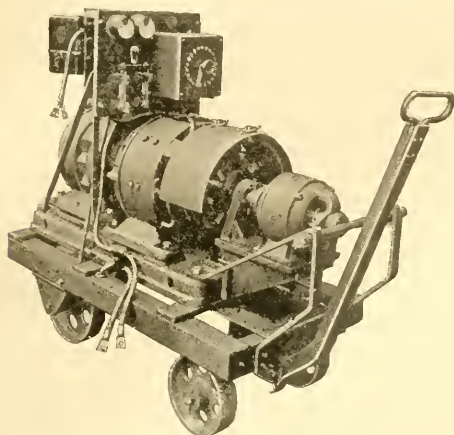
PORTABLE ARC WELDING OUTFIT
